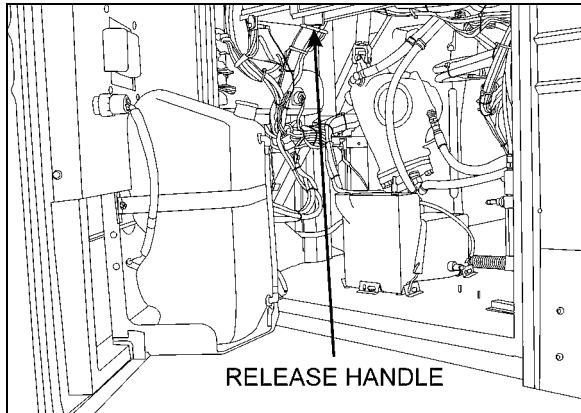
FRONT BUMPER RELEASE HANDLE 18613
